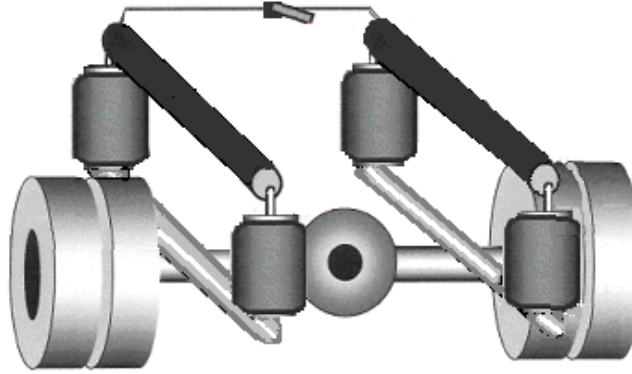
Schematic layout of the larger longitudinal air lines as implemented for drive axle on 2-axle school bus
